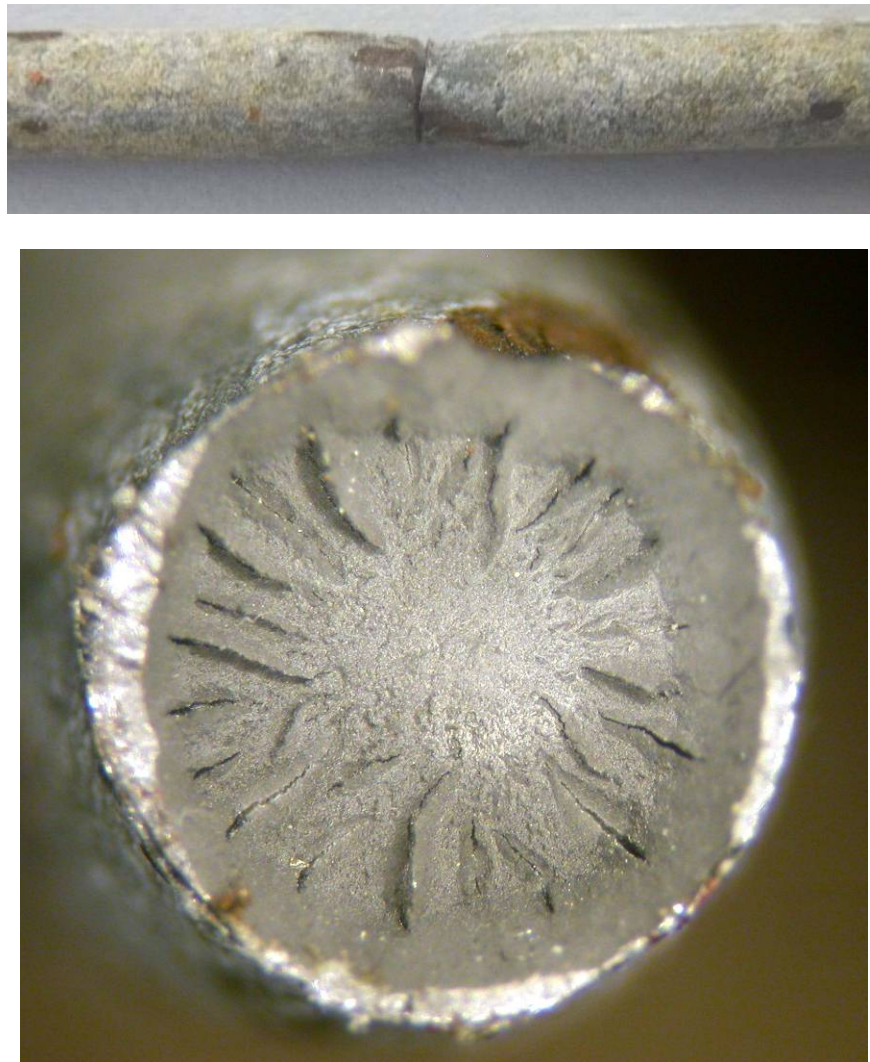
Wire 1-2 surface (top) and fracture surface after tensile testing (bottom).
